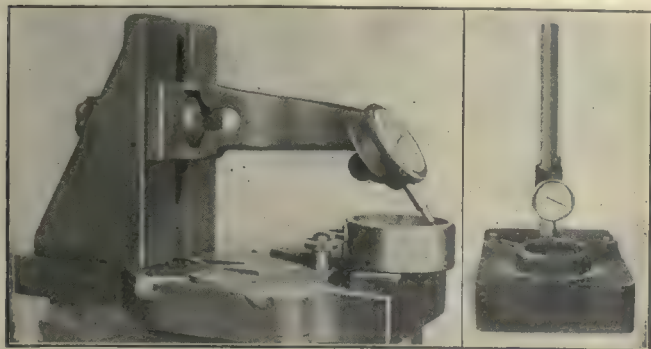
Gage for thrust bearing grooves. Fig. 9—Types of go and not-go gages
